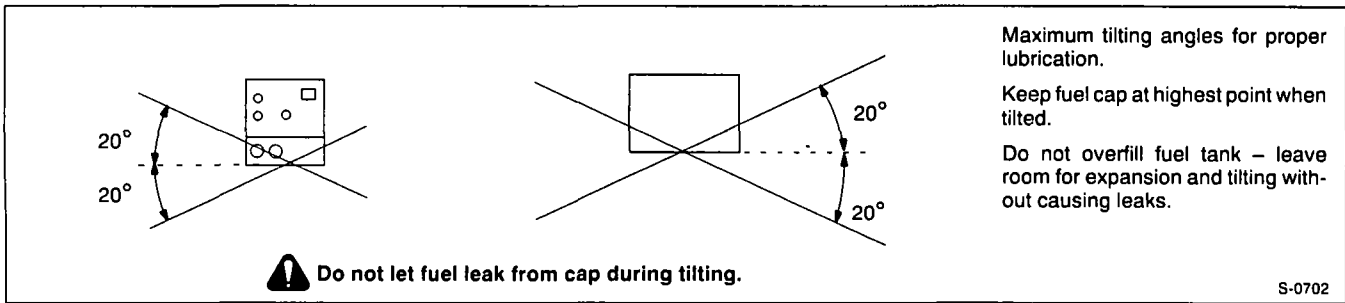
Maximum Welding Generator Tilt Angles
